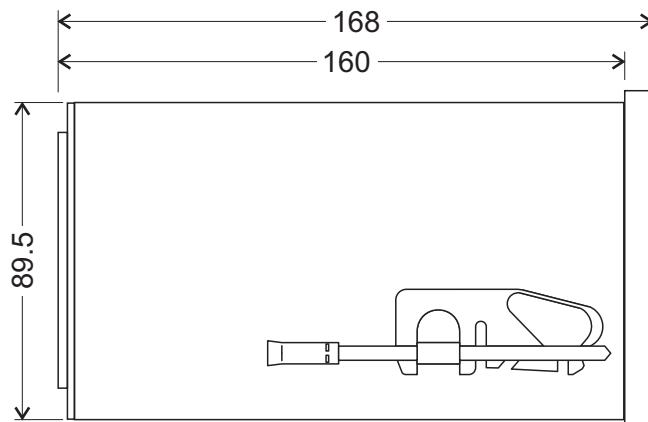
Dimension drawing of the LF 296 (dimensions in mm)
